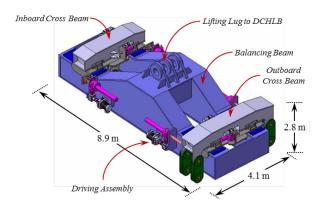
Configuration, overall dimensions and main components of the sector lifting tool; length 8.9 m, width 4.1 m, height 2.8m and weight about 62 tons.
